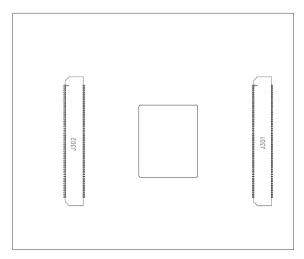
AirPrime SL6087 Socket Board (Bottom View)
